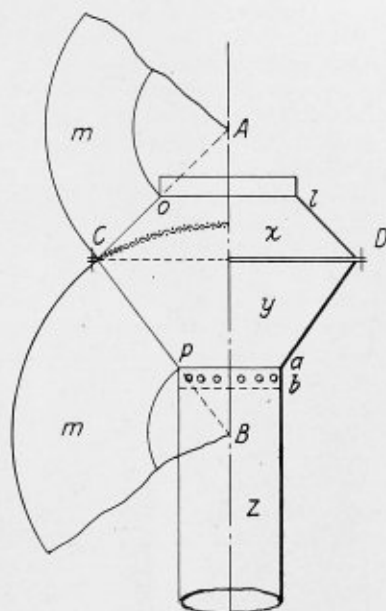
View Showing Elevation and Pattern of a Diamond Stack
